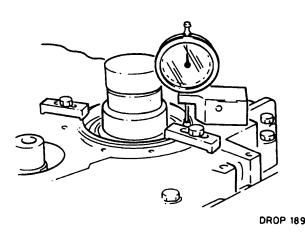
Gearbox housing/input shaft bearing - dimension 'C'
